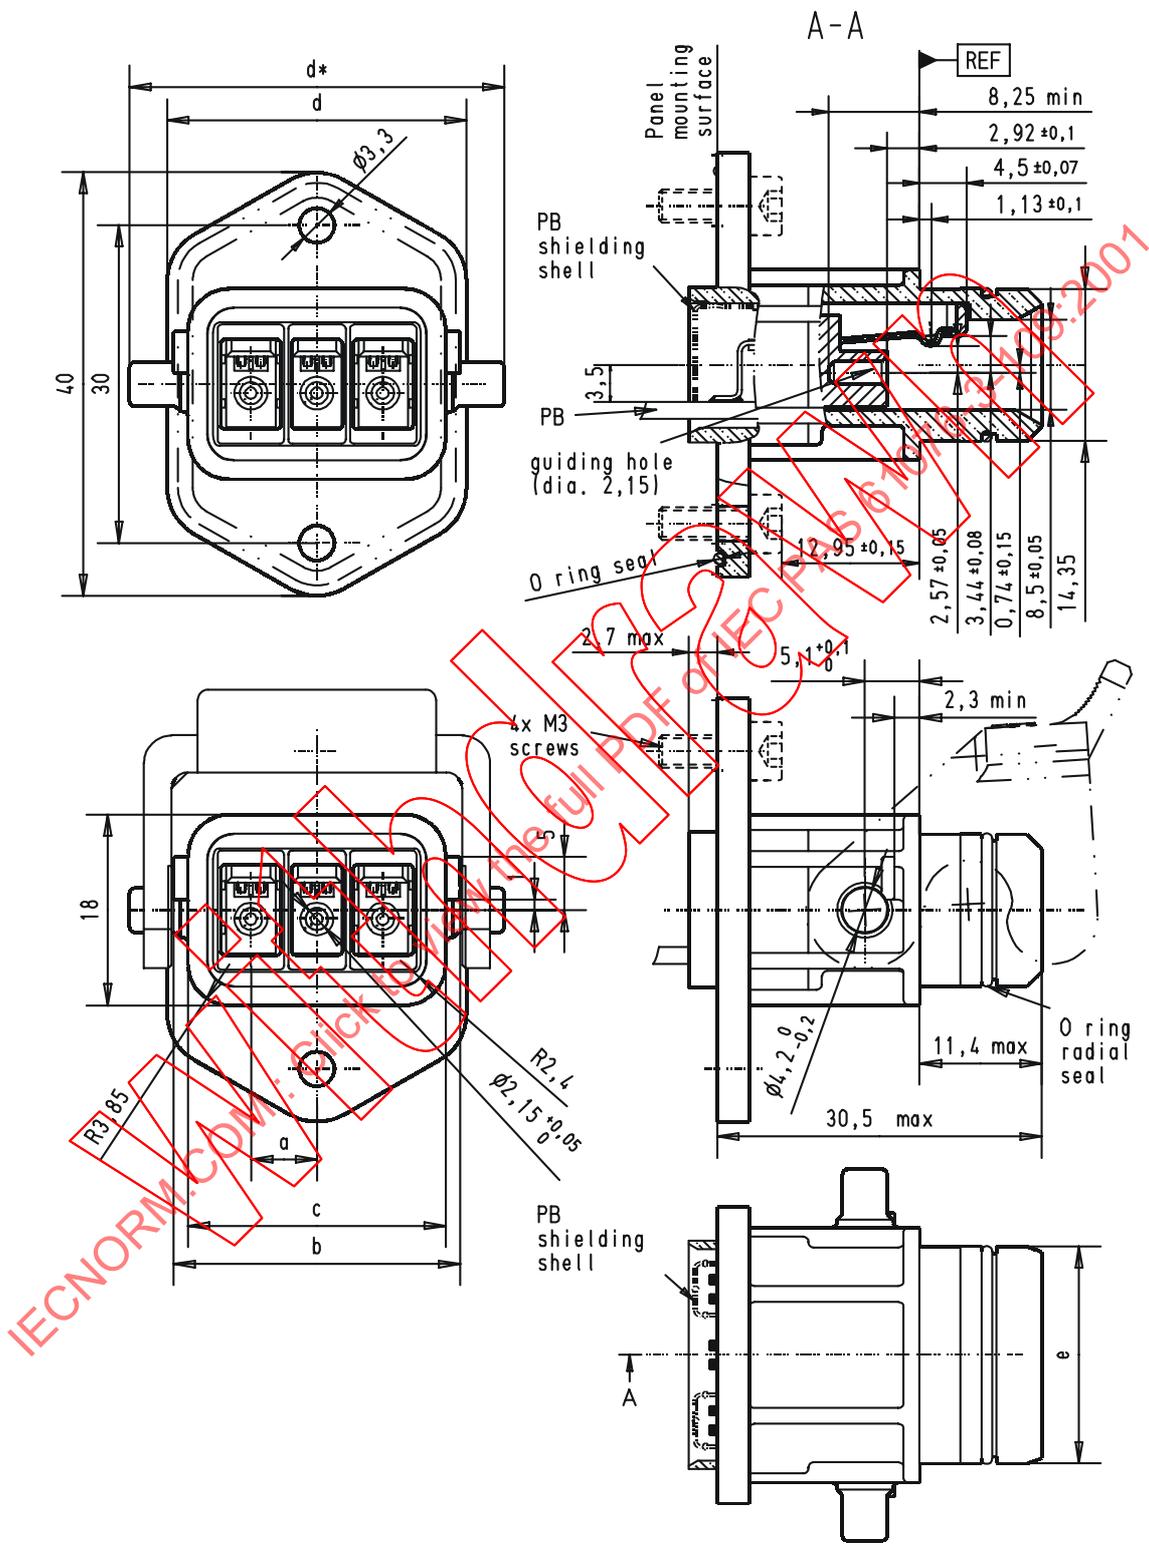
Fixed connector with housing, shielding, insulation body and contacts.
